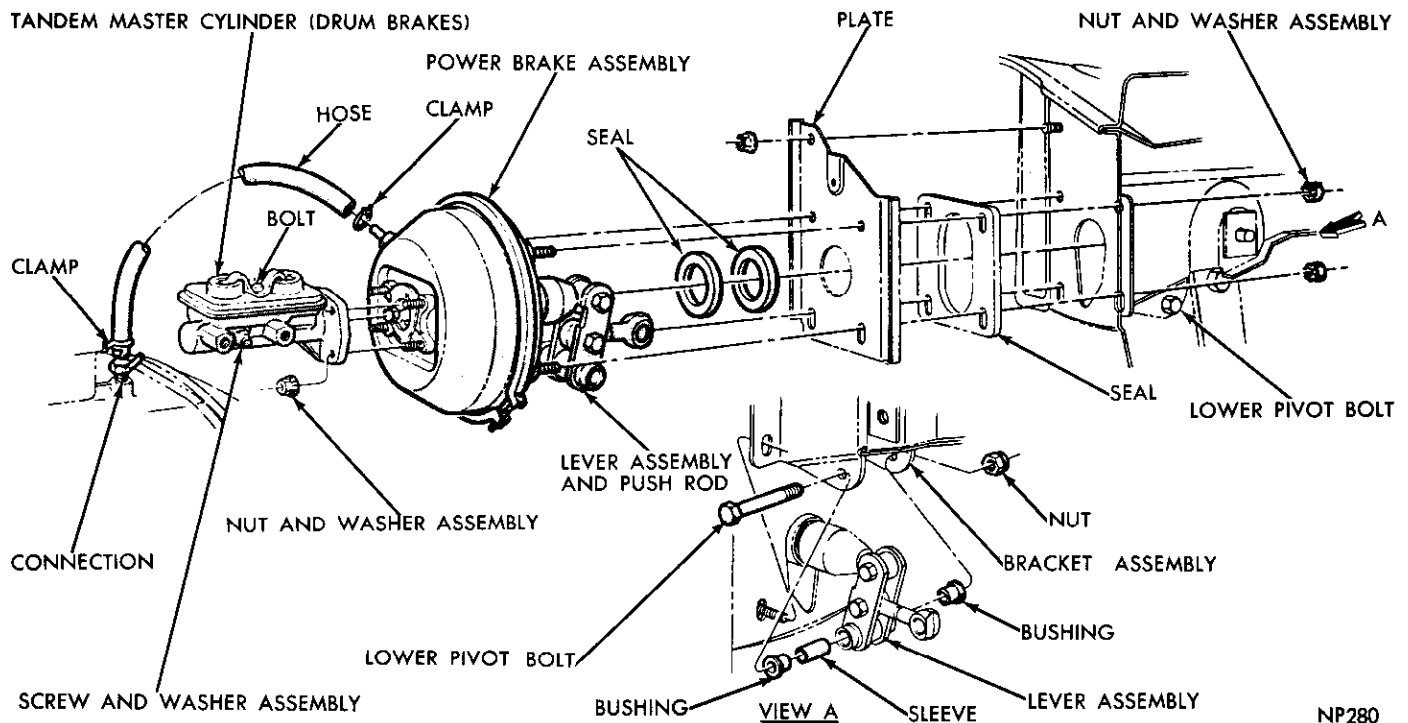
Power Brake and Master Cylinder (Drum Brakes)
